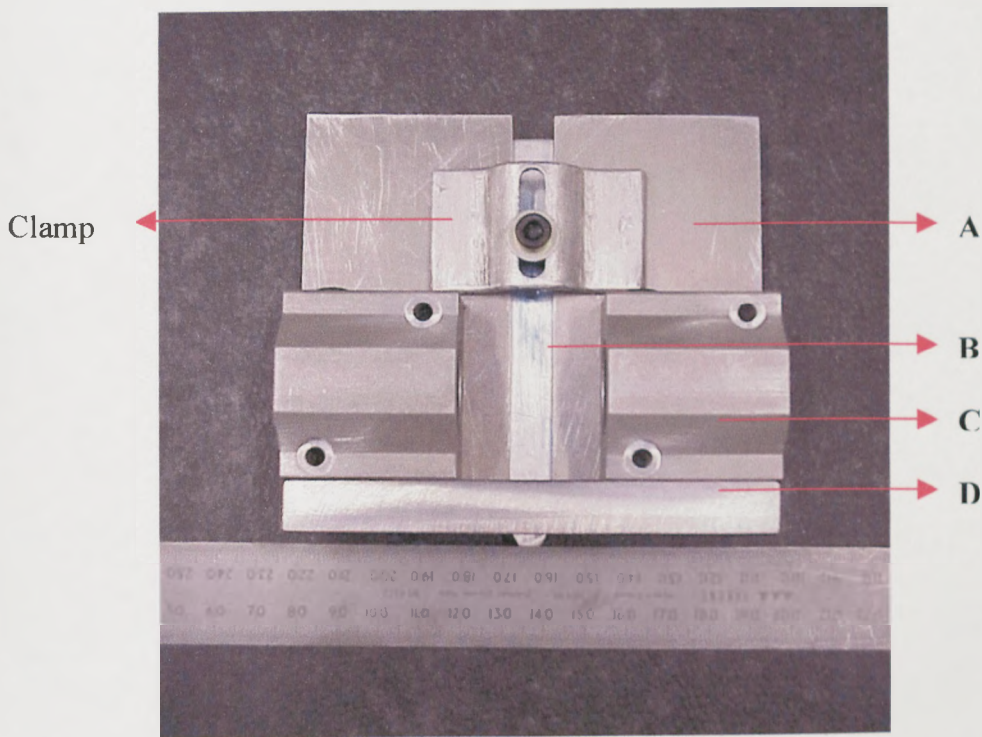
Back view of the V-hopper including the clamp and linear bearings
